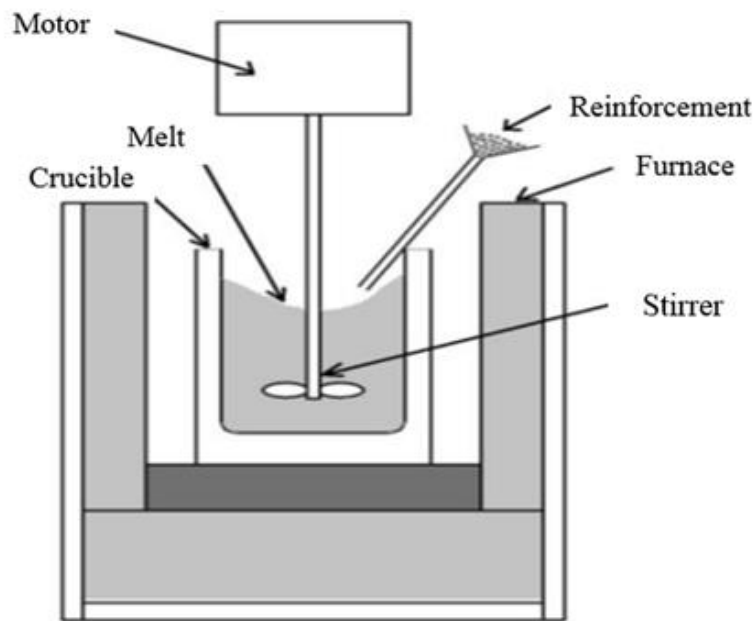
2. Schematic View of Stir Casting Setup [20]
